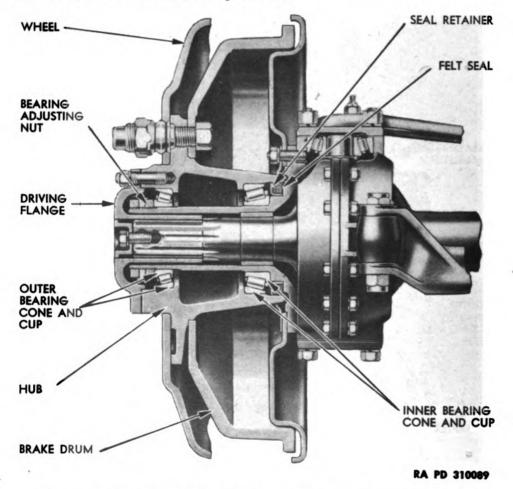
Front Wheel, Hub, and Drum, Cross-sectional View (6x6) (Conventional-type Drum)
